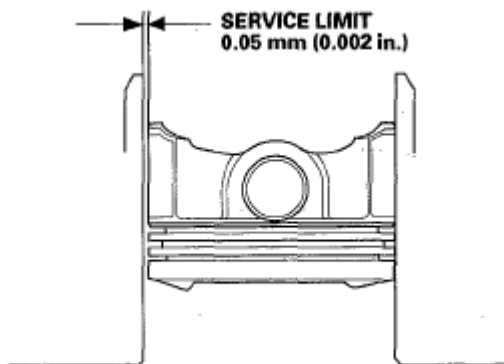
Identifying Piston-To-Cylinder Bore Clearance
